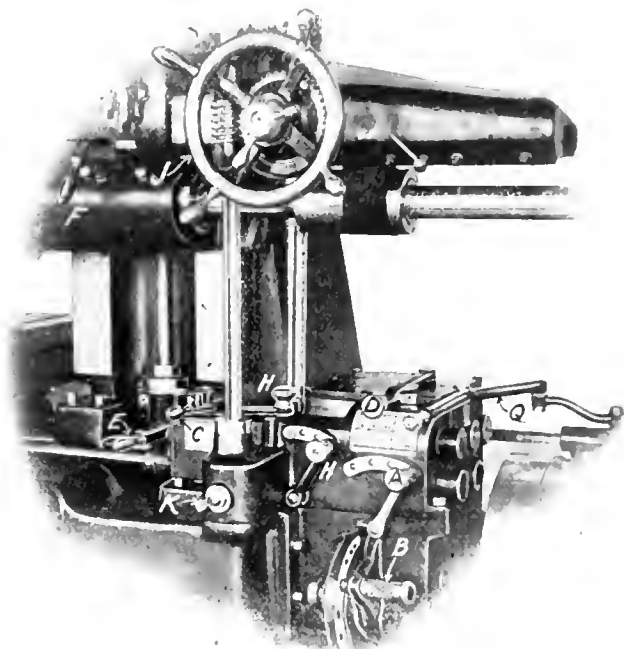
View showing the Arrangement of the Controlling Handles in Locations convenient to the Operator.
